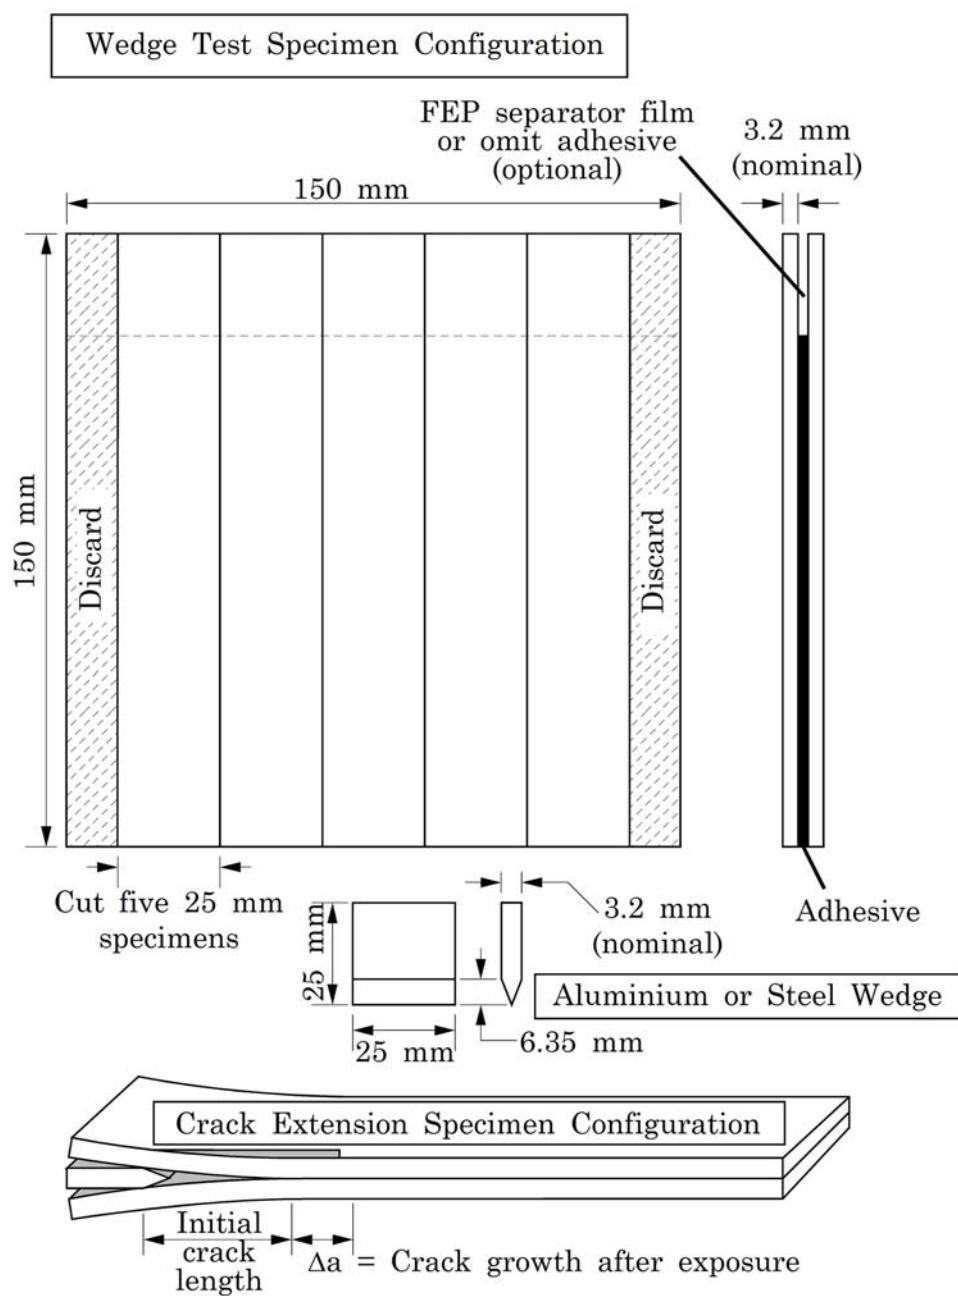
ASTM D-3762: Wedge test specimen
